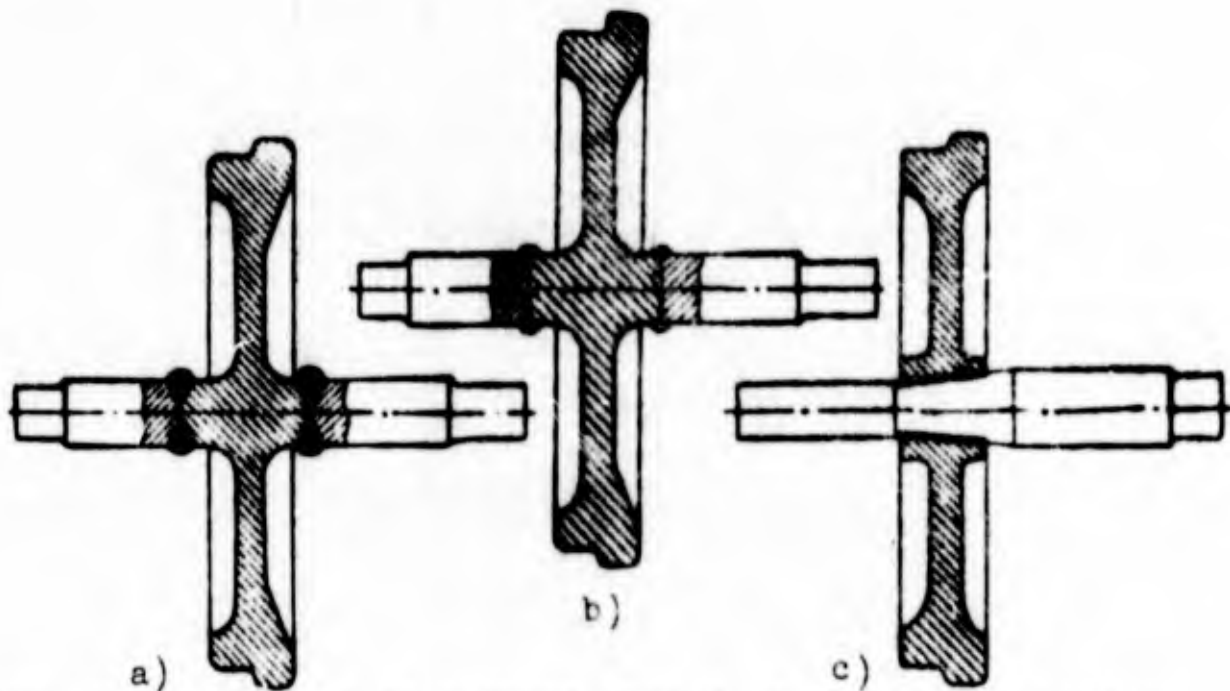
Welding of turbine wheels of turbopump units to shafts. a) seam; b) flash butt; c) friction.
